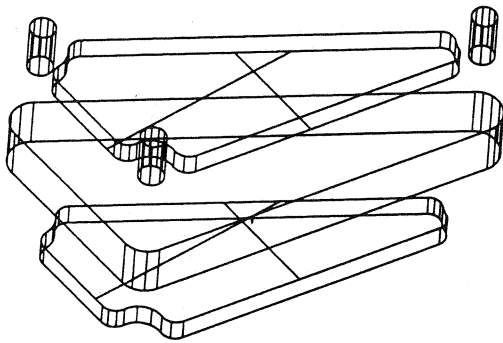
Exploded view of the features making up the reverse engineered shock plate.
